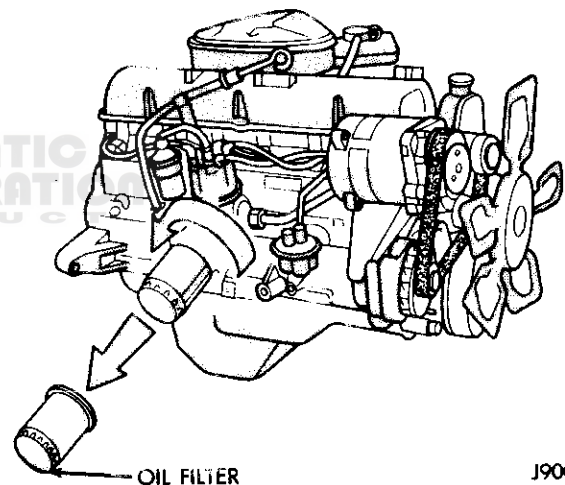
Oil Filter Removal/Installation—2.5L Engine
